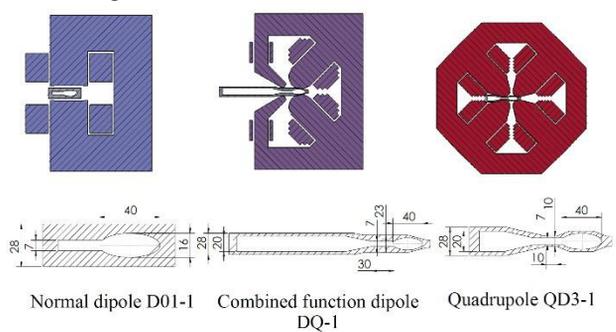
Cross-section of stainless steel vacuum chamber inside magnets. The machining and positioning of the bending chamber must be precise for not to conflict with the active components nearby.
